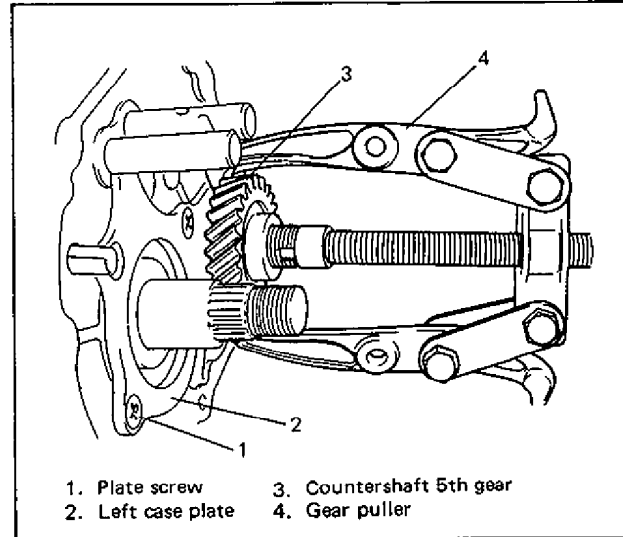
A-27 Removing 5th Gear and Left Case Plate
